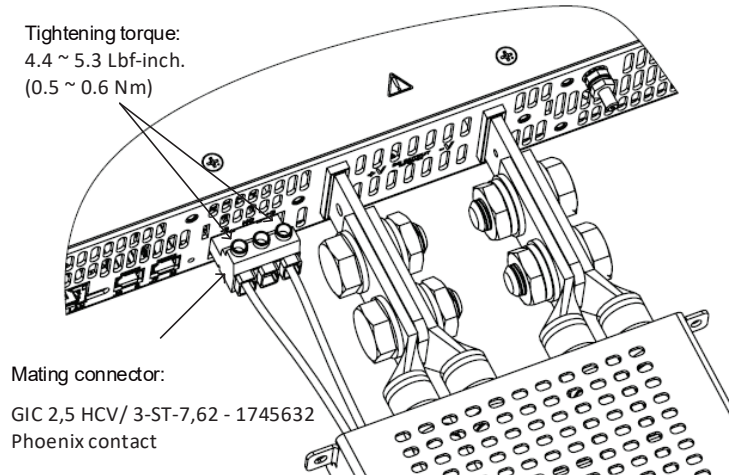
7.5kW Remote Sense Plug Assembly
